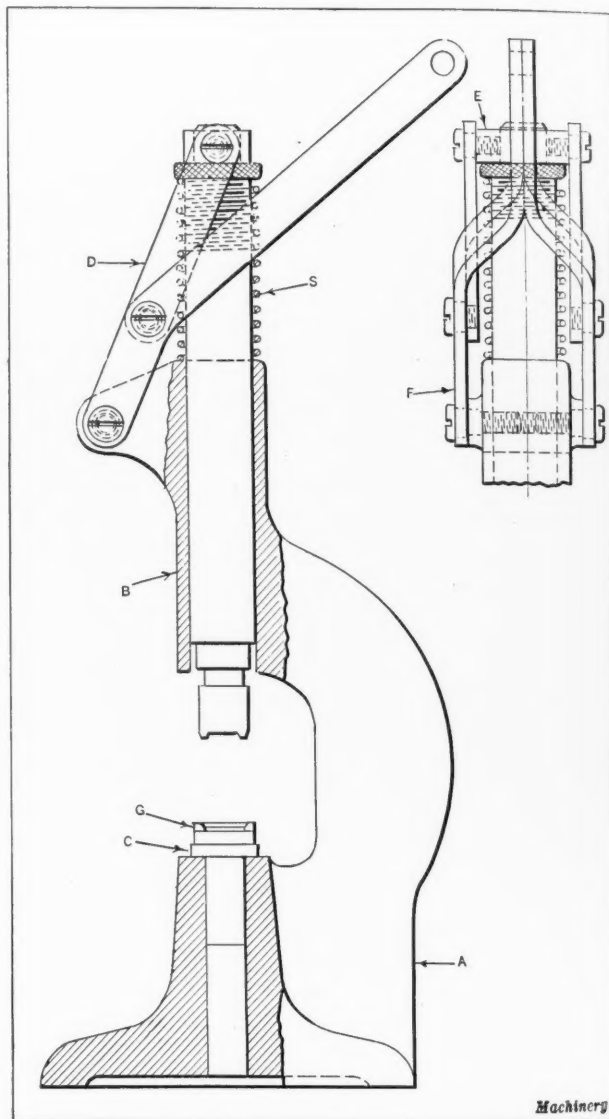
Fixture for assembling Shaft and Gear shown in Fig. 5
